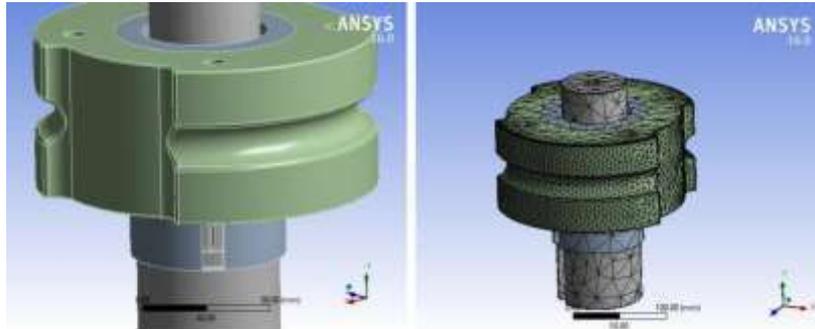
Assembly of the Roller Die, Bush,Support cylinder and Meshed components
